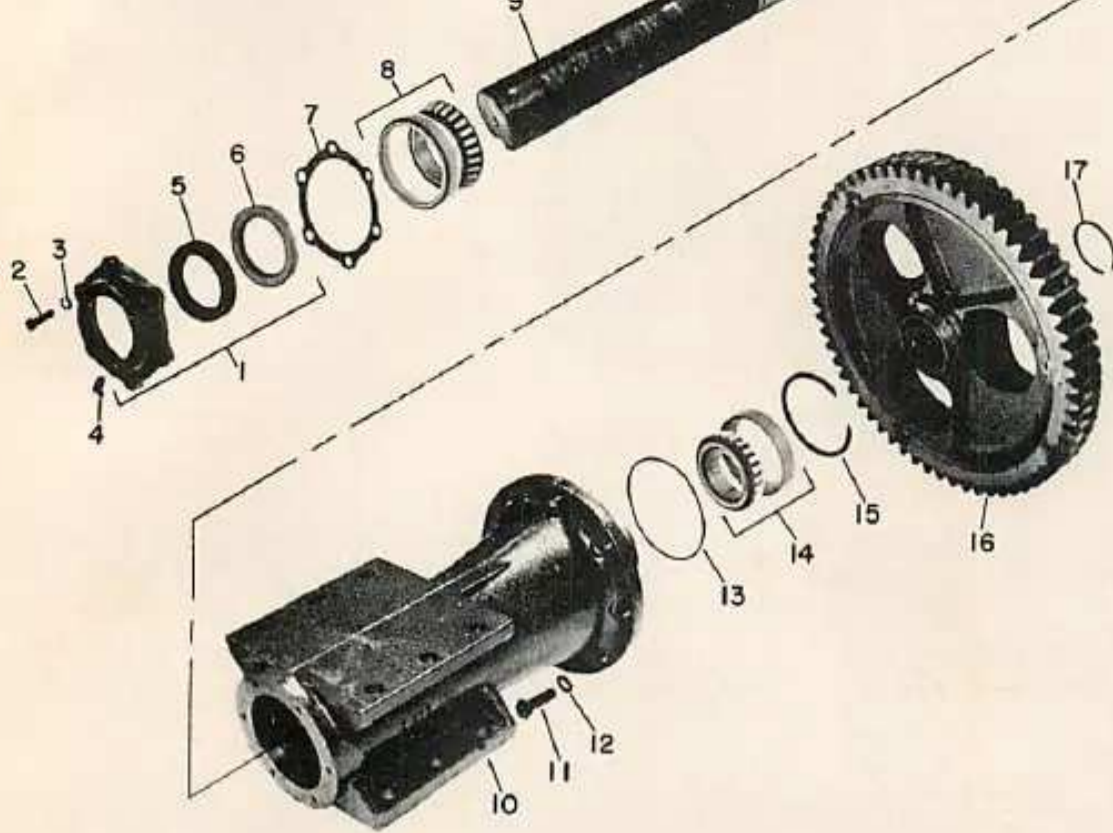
Exploded view of rear axle, carrier and bull gear assembly. Axle shaft bearing preload is adjusted by varying thickness of shims (7). Bull gears are retained on inner end of axle shafts by snap rings (17).
